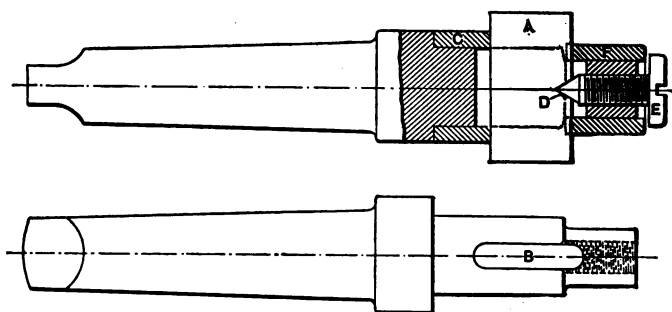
Counterbore with Interchangeable Blades and Guide Bushings
